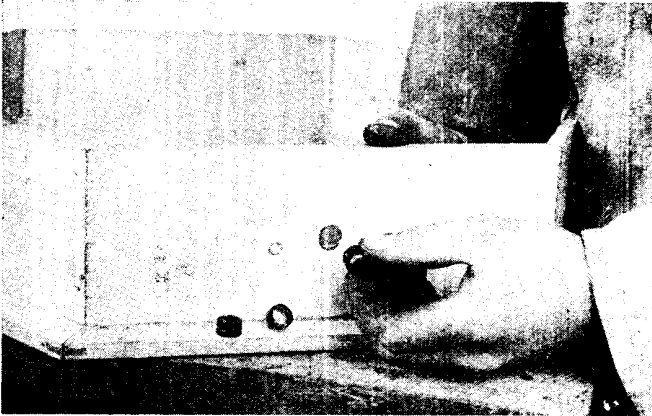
Ebonite bushings are fitted in the spindle holes in the side of the frame
